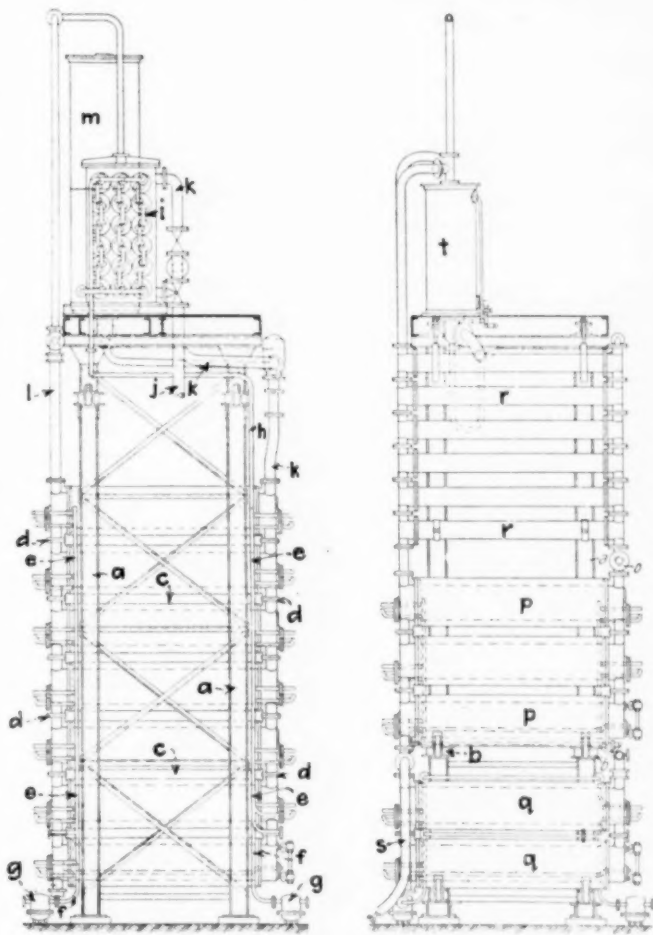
FRONT VIEW OF ASSEMBLED STILL
